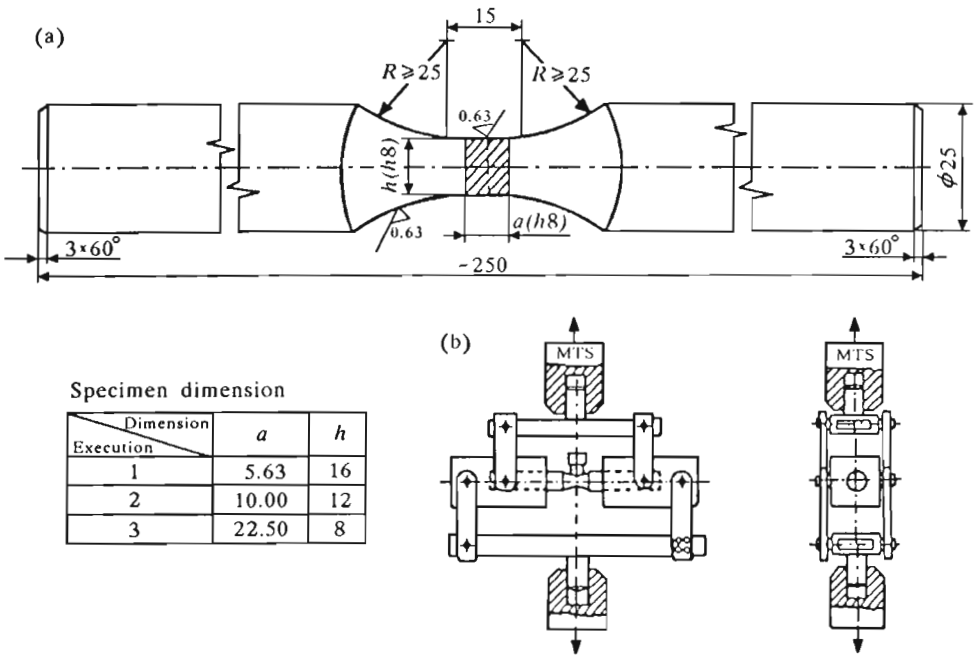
The specimen for investigations (a) and the test equipment for realisation of plane bending (b)
